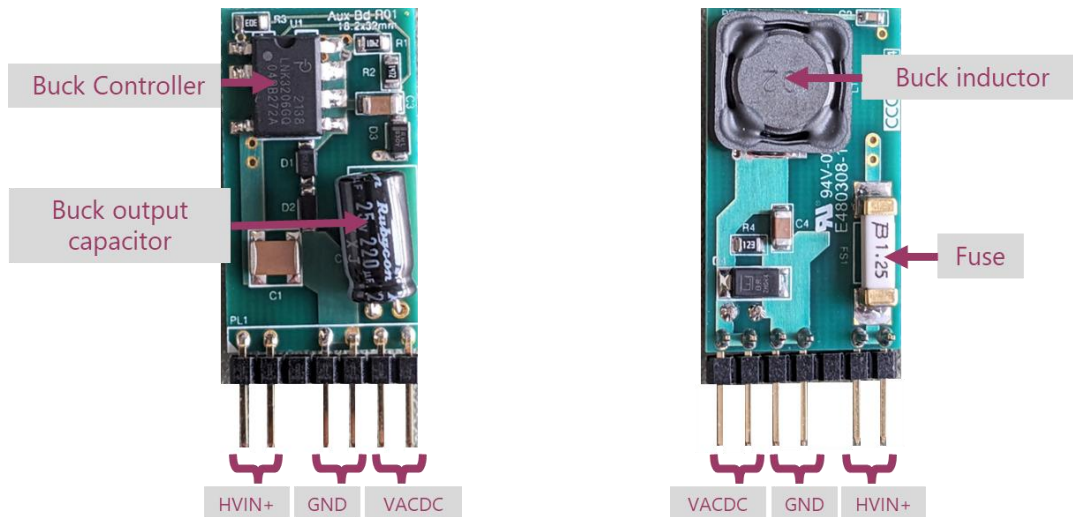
Auxiliary daughterboard. Top side (left) and bottom side (right) views
